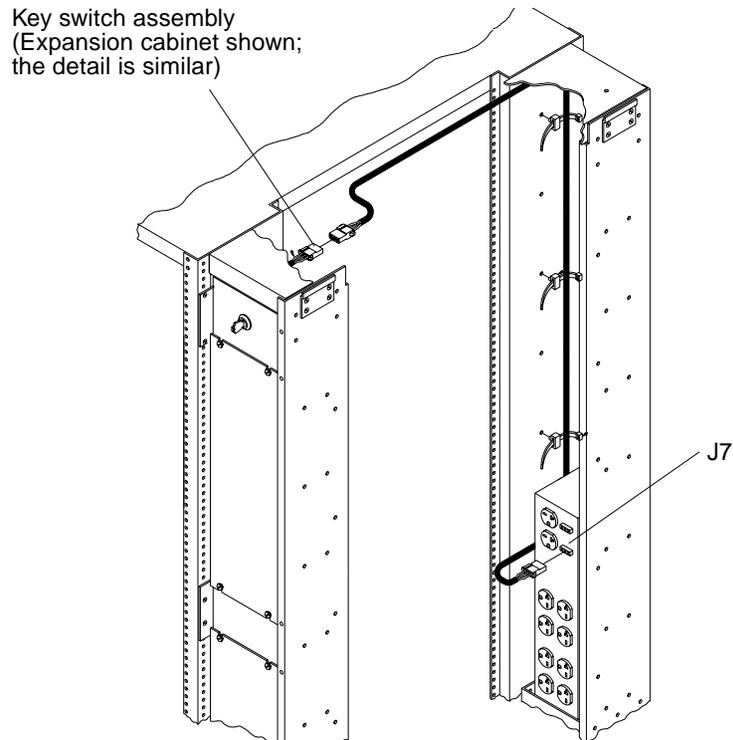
Disconnecting the Key Switch Power Connector — Three Piece Assembly
